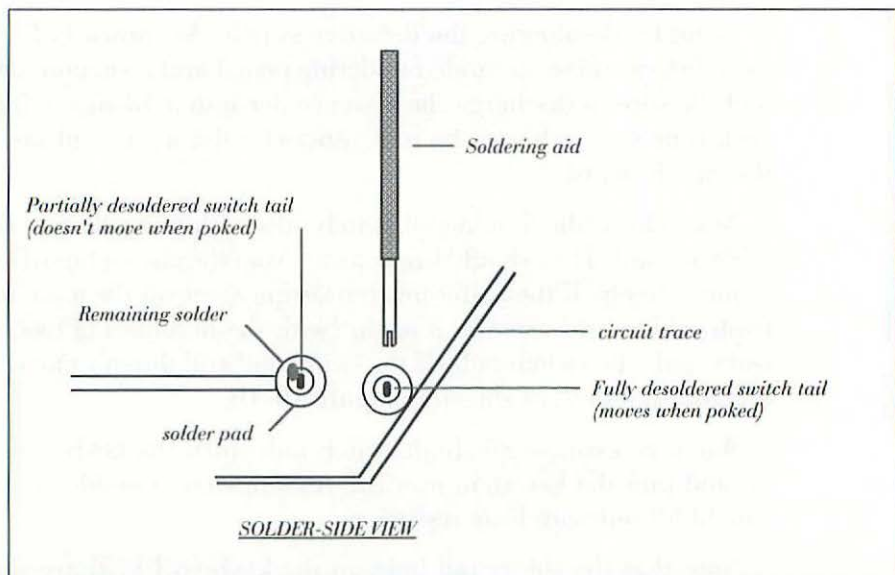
The desoldered switch tails should move freely when poked with a soldering aid.
